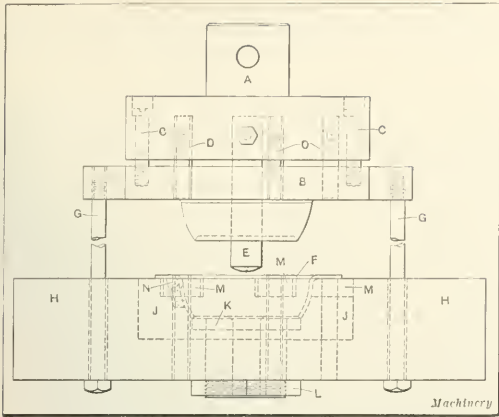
Punch and Die for piercing Holes in Flange, beveling Bottom Edge of Shell and truing up Work
